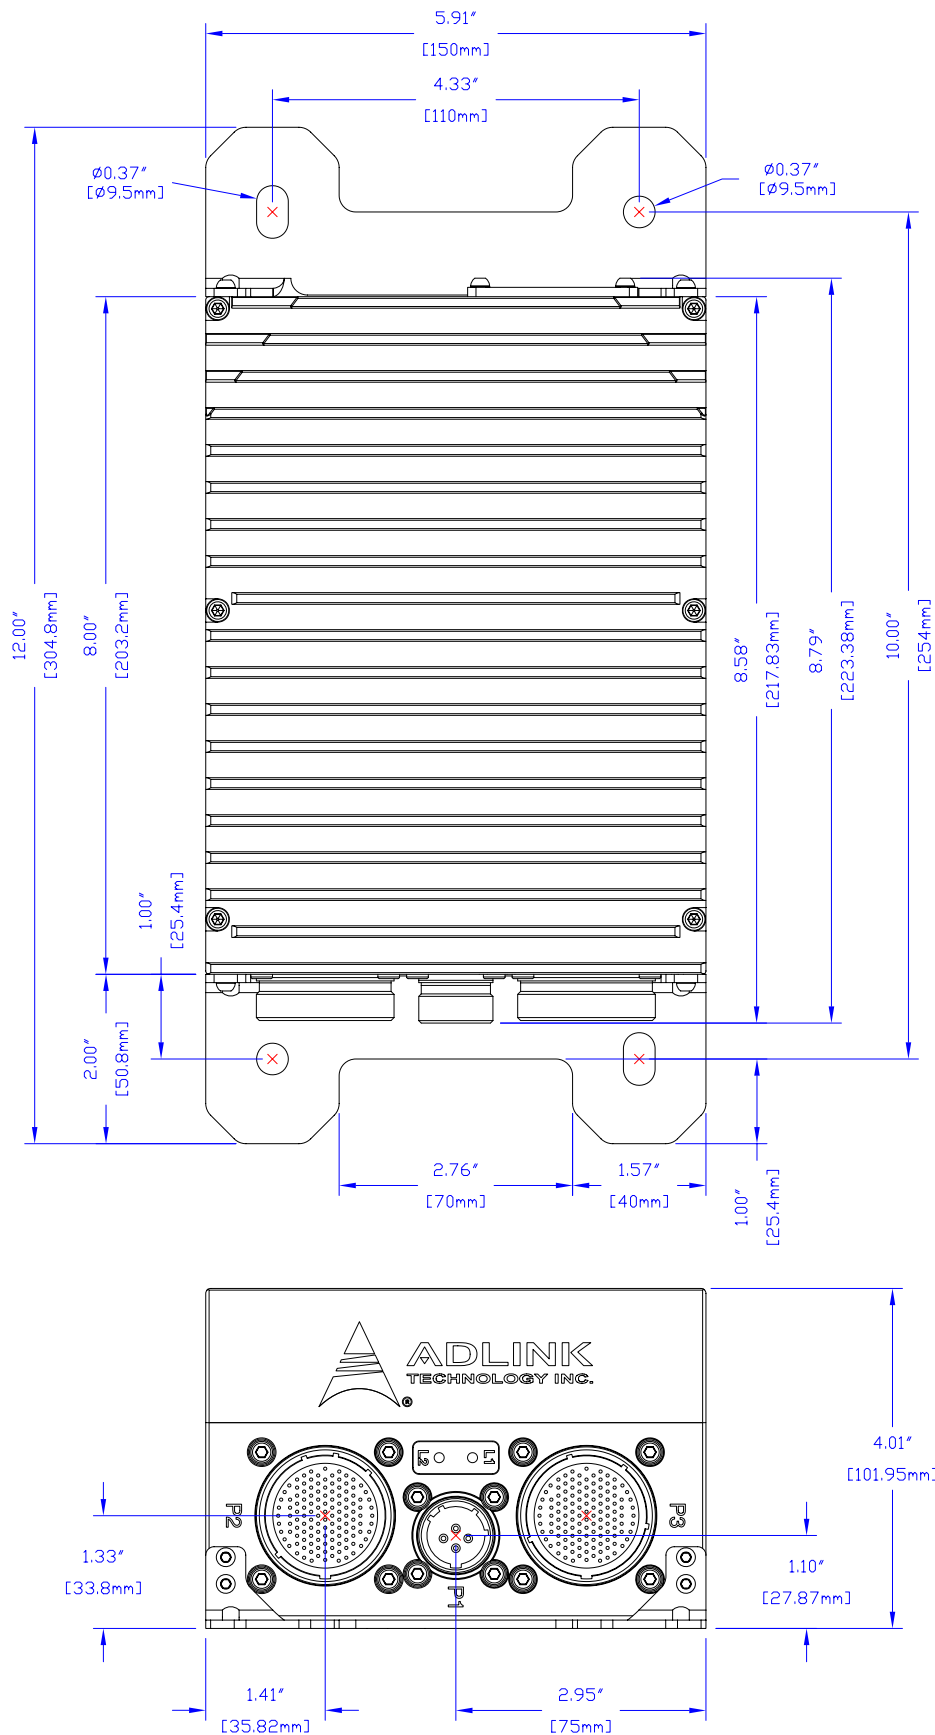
Top and Front Views of “MH” Enclosure with Mounting Dimensions
